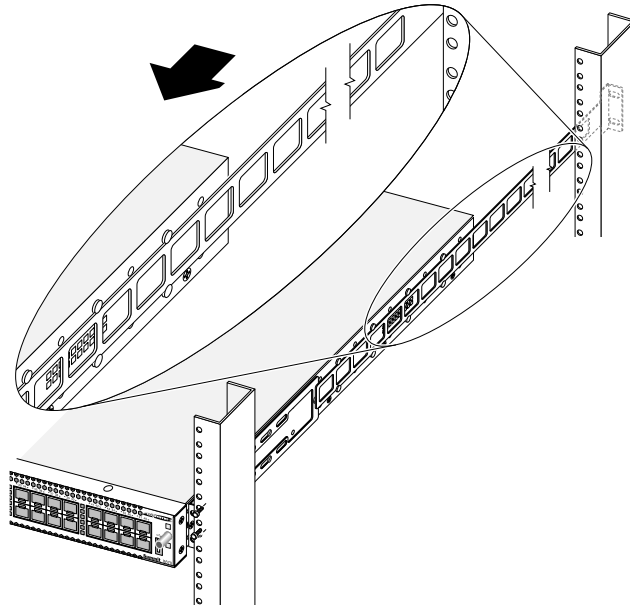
Inserting the Rear Mounting Brackets Between the Pegs on the Side of the Switch
